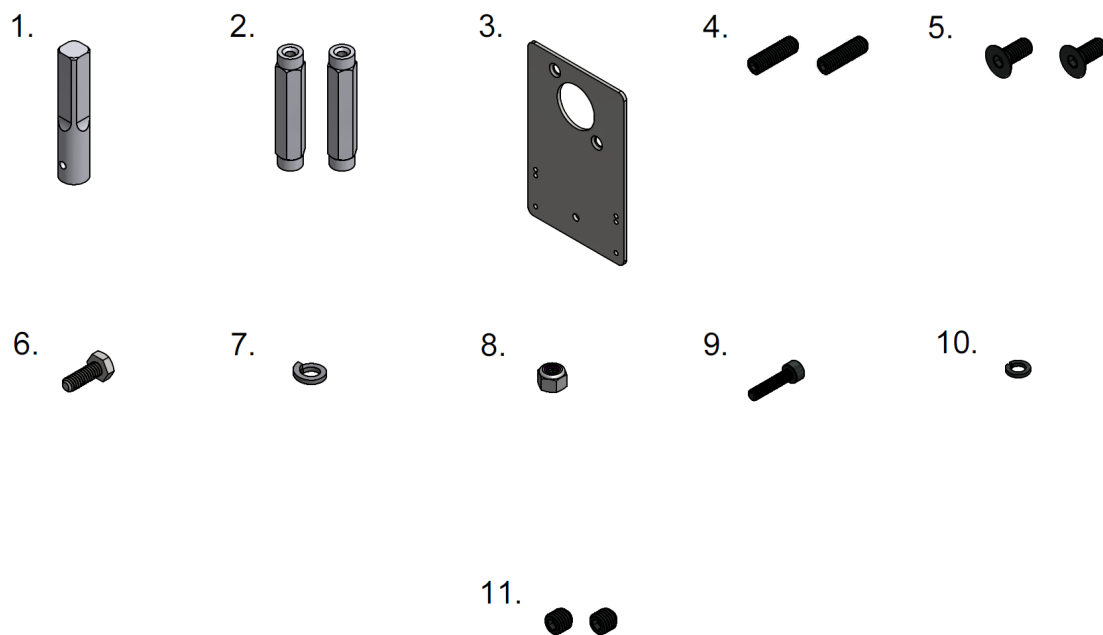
Pieces Supplied with the AGA93.4 Bracket Kit
